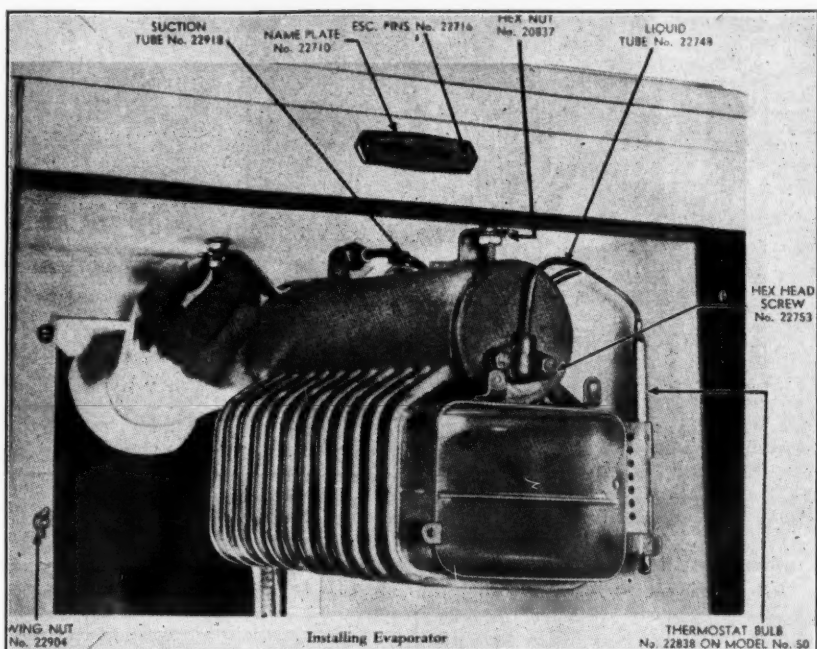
In installing evaporator, excessive tipping should be avoided.
